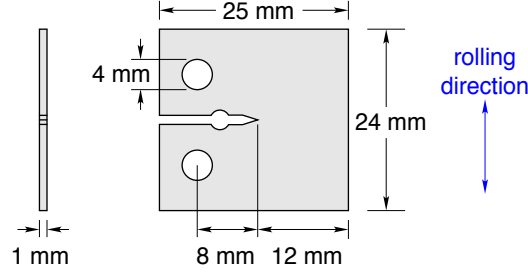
Compact tension samples conforming to ASTM E561 were cut with wire EDM from the cold-rolled sheets with the rolling direction perpendicular to the crack notch.
